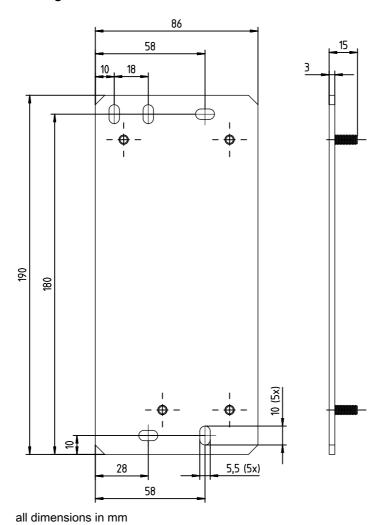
Dimensioned drawing of adapter plate for DDLS 200 replacement
